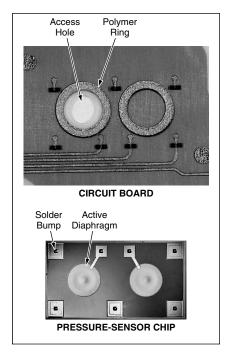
The Pressure-Sensor Chip and Circuit Board are shown here as they appear before they are put together by use of a modified flip-chip technique.
